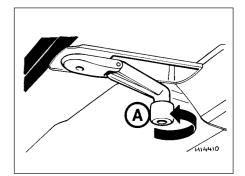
Sunroof control handle (A) (Sec 28)
